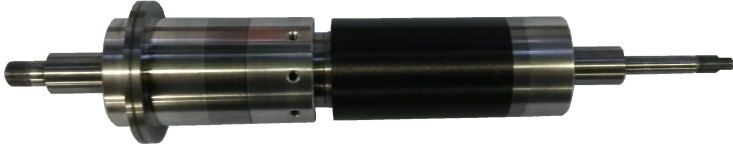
Assembled rotor with combined axial-radial magnetic bearing on the left and the self-bearing motor rotor on the right: The combined axial-radial magnetic bearing is composed of an axial disk to generate axial thrust and an iron stack part to generate radial forces on the non-drive end. The permanent magnet is two-pole diametrically magnetised and supported by a carbon bandage (in black) in order to withstand the high centrifugal forces at 60 000 /min.
